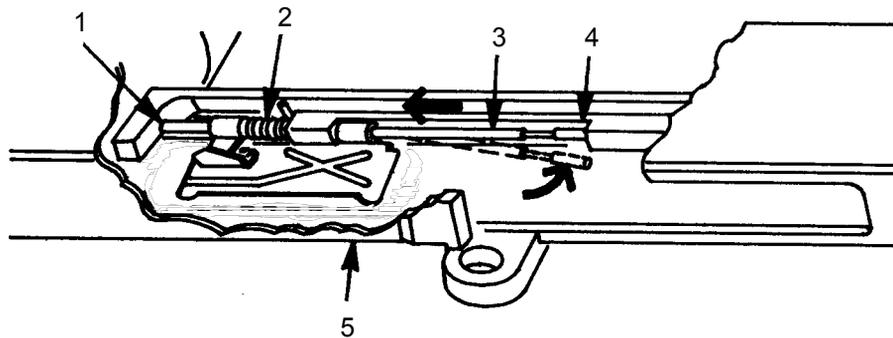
Assembly of Grooved Headless Pin and Torsion Spring into Receiver.
